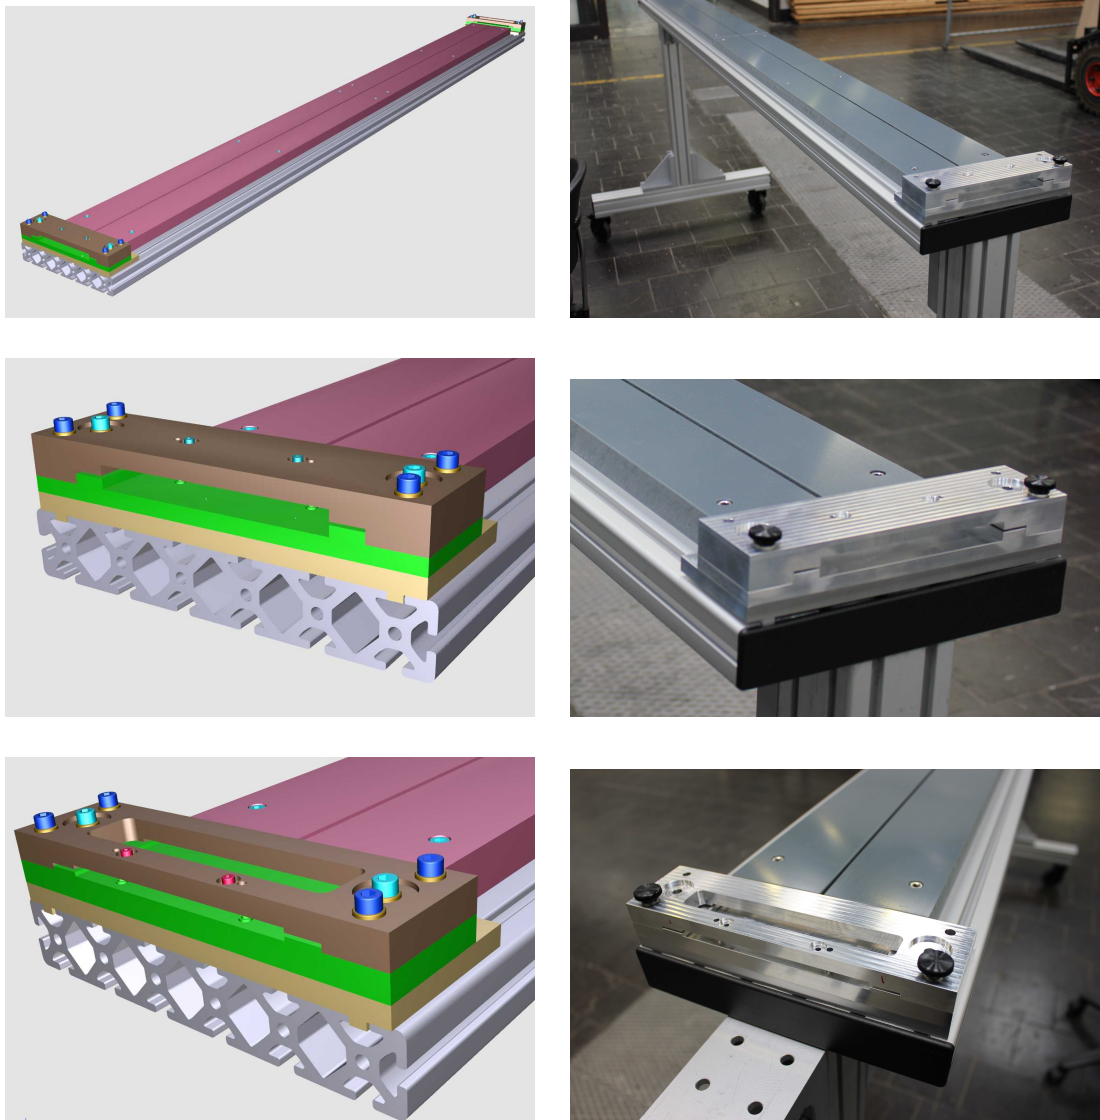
Multi Purpose Jig: Drawing and photo of jig (top), drawing and photo of bracket endpiece readout side (middle), drawing and photo of bracket endpiece mirror side (bottom)
